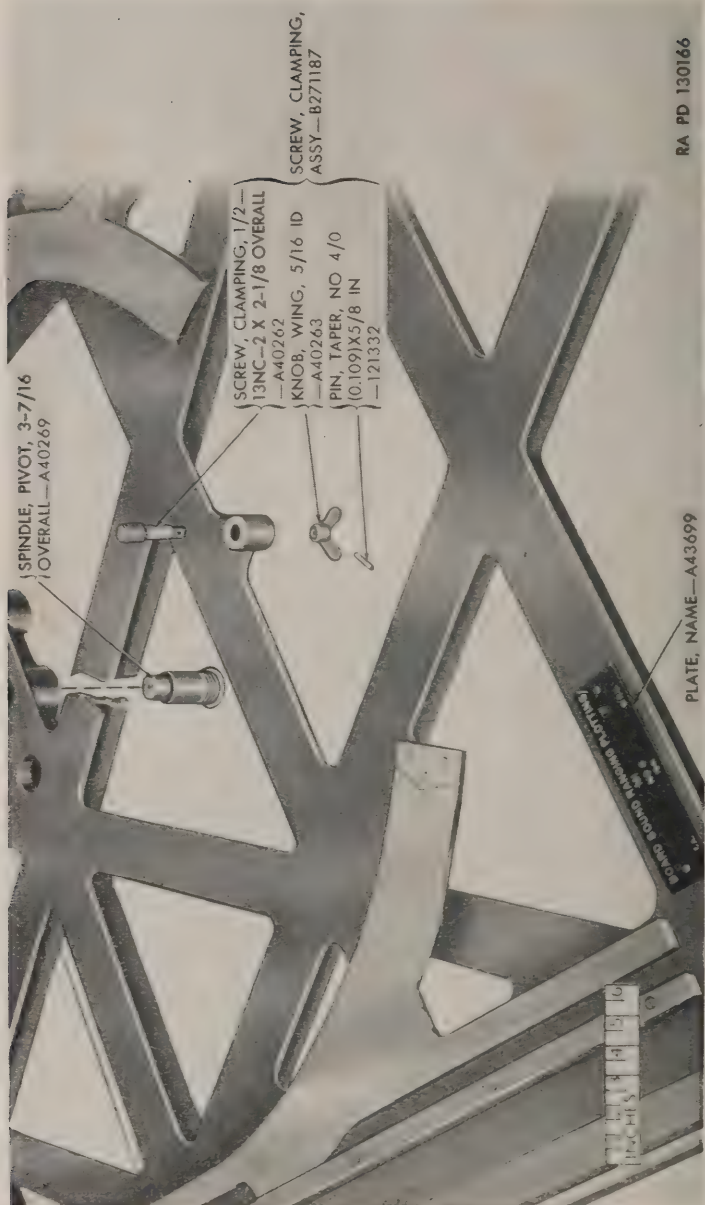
Pivot Spindle and clamping screw assembly--B21187 removed from frame--D43613--sound-ranging plotting board M1 or M1A1
